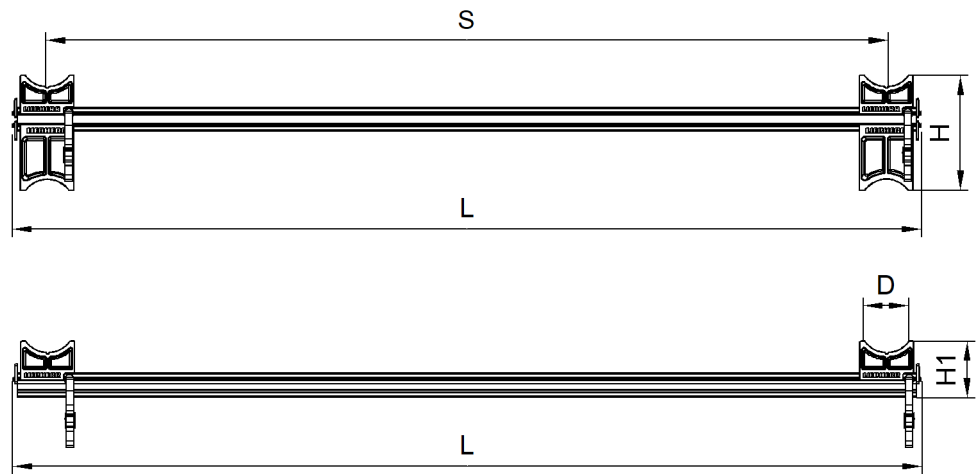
Dimensions - stacking device 3000 mm (9.84 ft)
